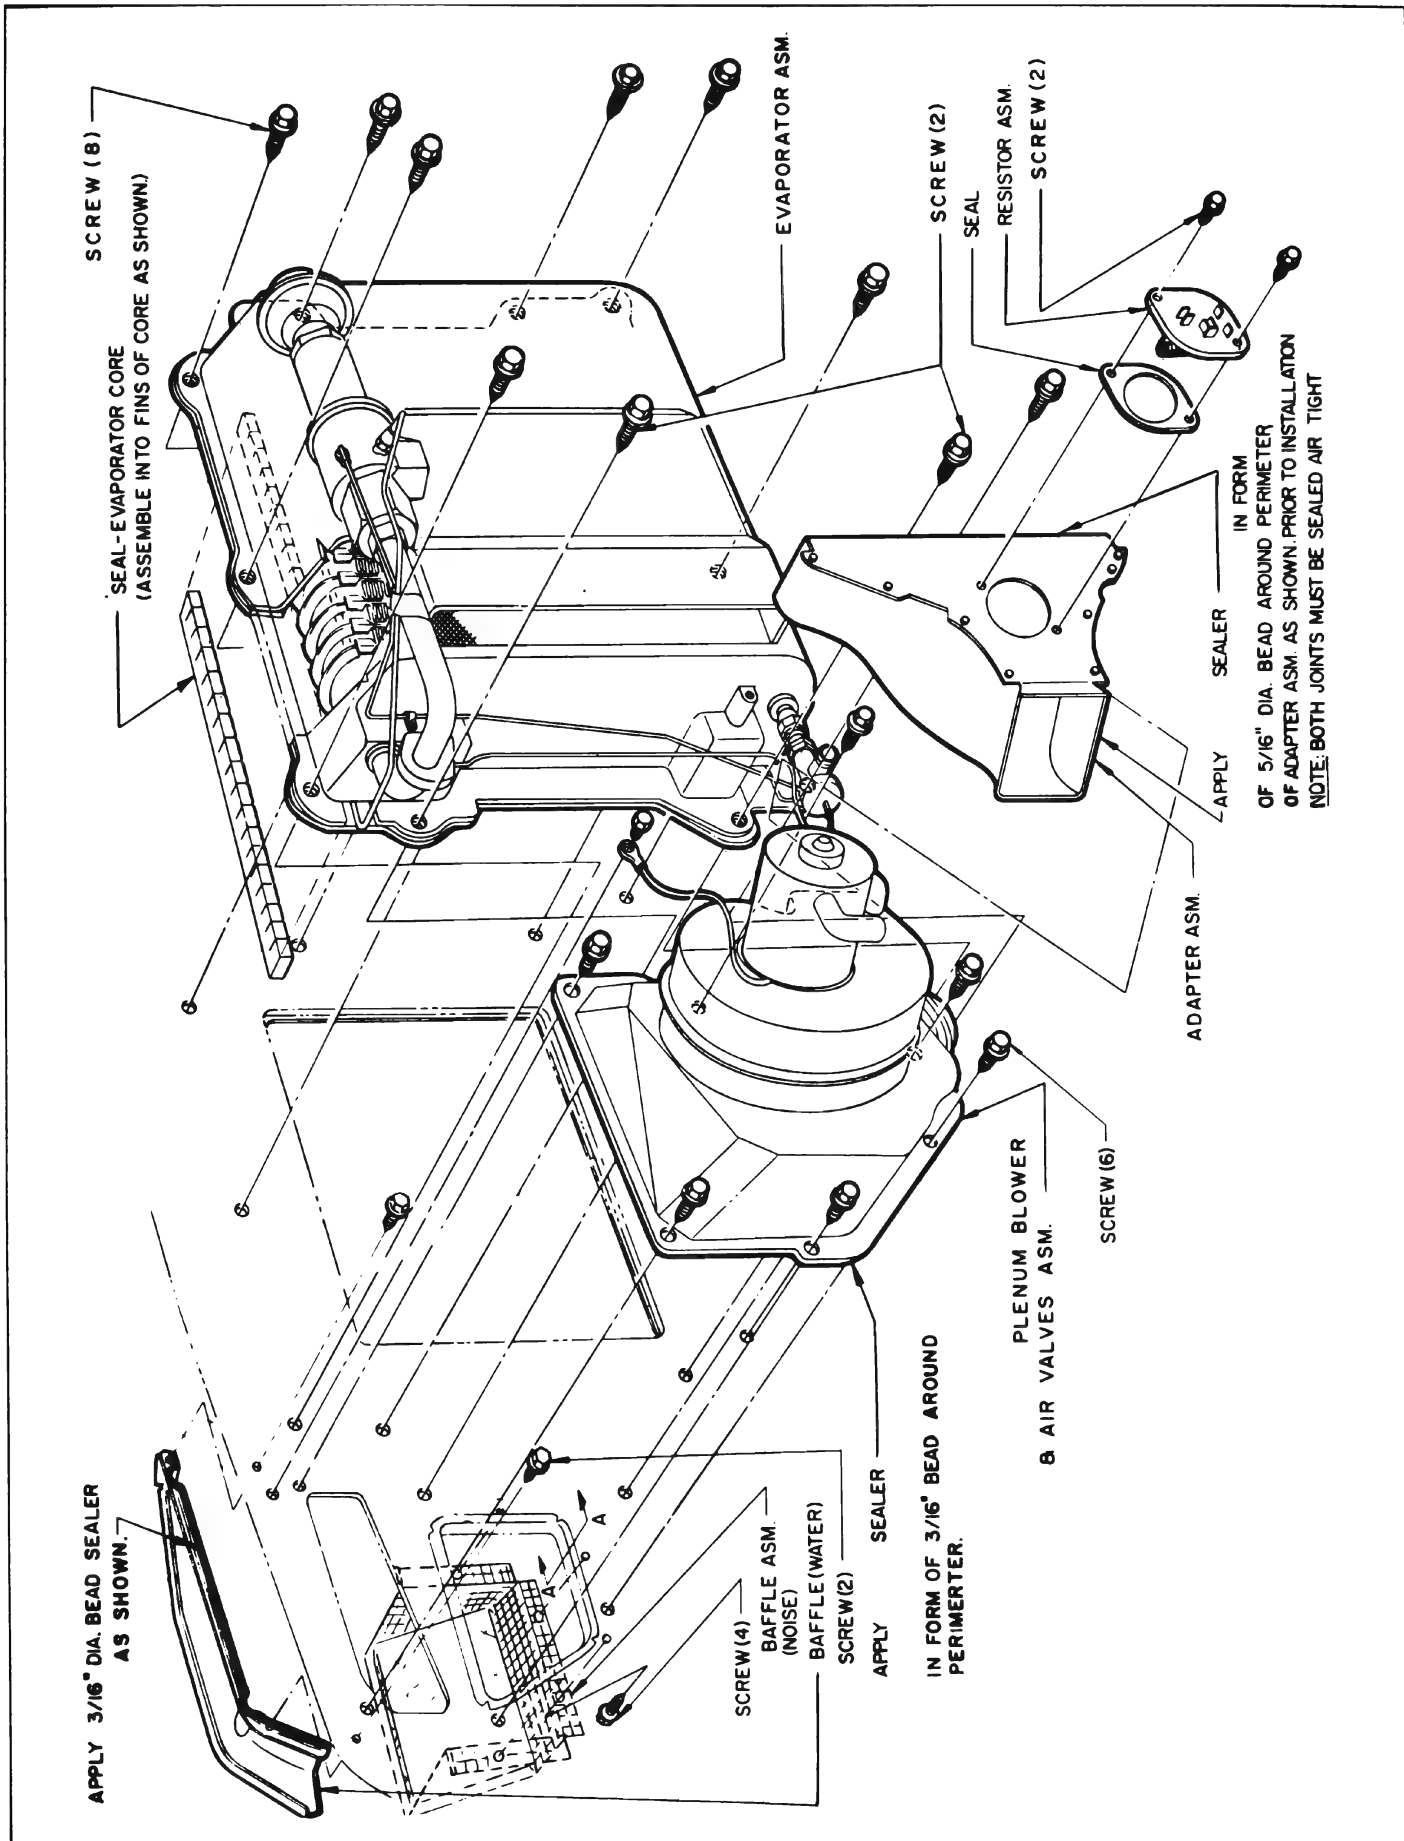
Evaporator Assembly, and Plenum Blower and Air Valve Assembly - 4400, 4600 and 4800 Series
